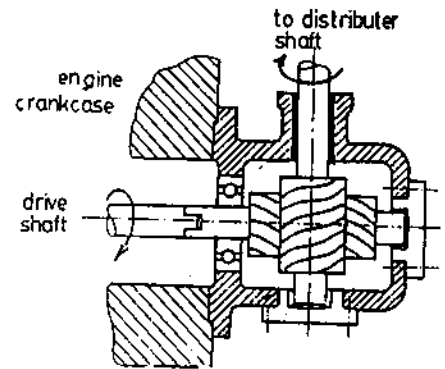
DEVELOPED POWER TAKE OFF TO DRIVE IGNITION DISTRIBUTOR SHAFT
